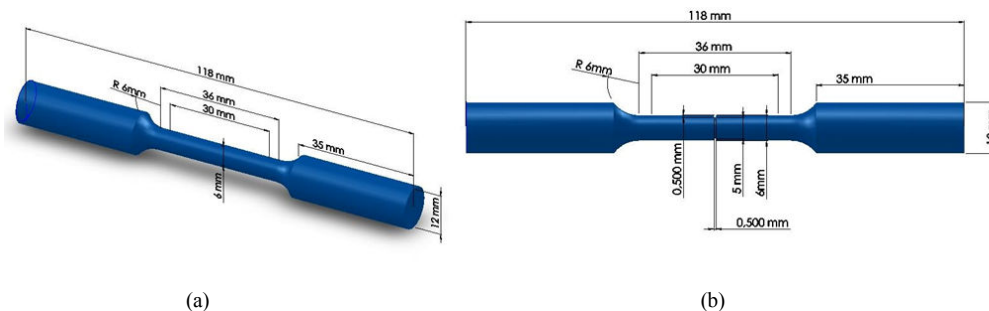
Schematic drawing of the test specimen (a) without notch and (b) with notch.
